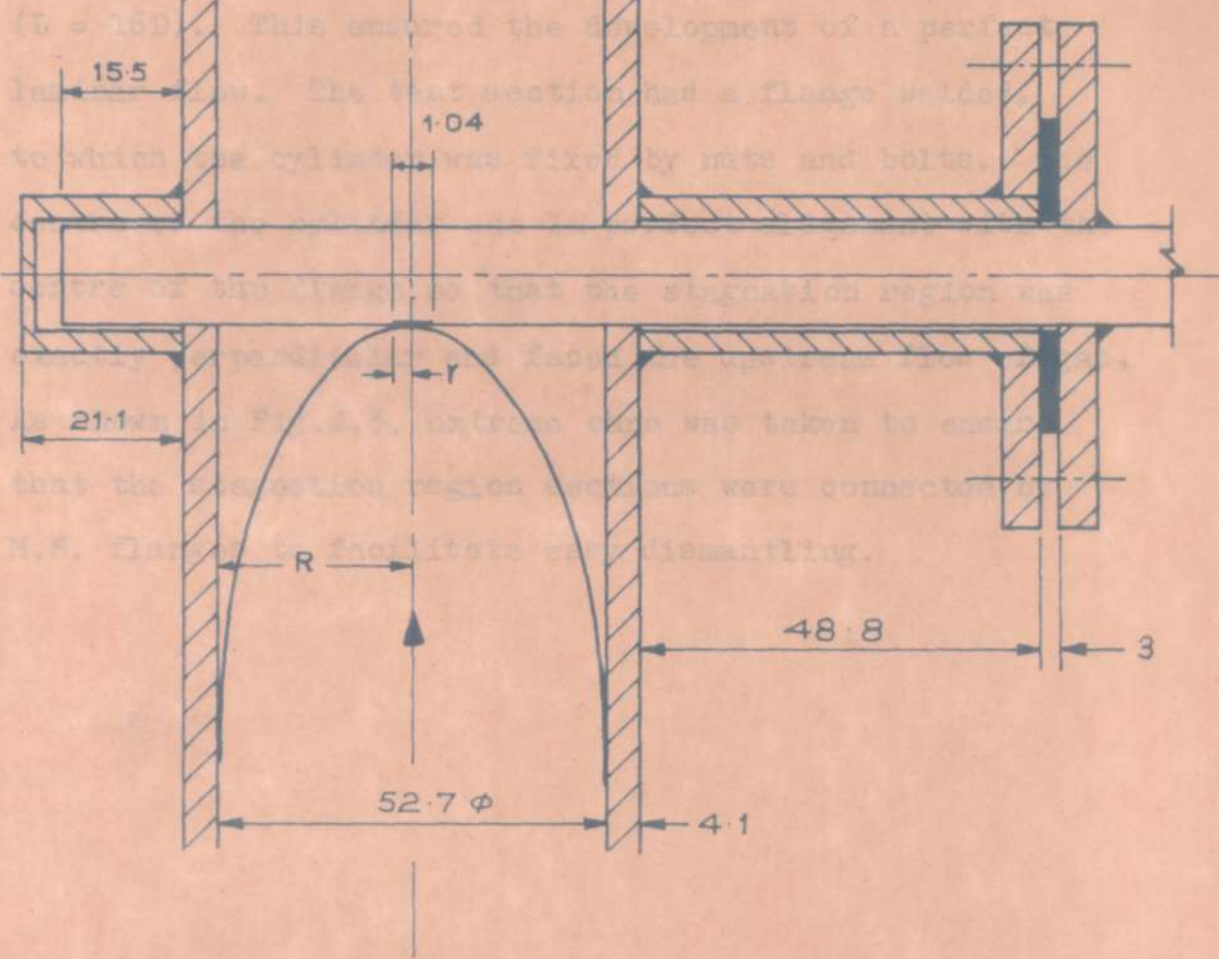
TEST SECTION (ENLARGED VIEW)
